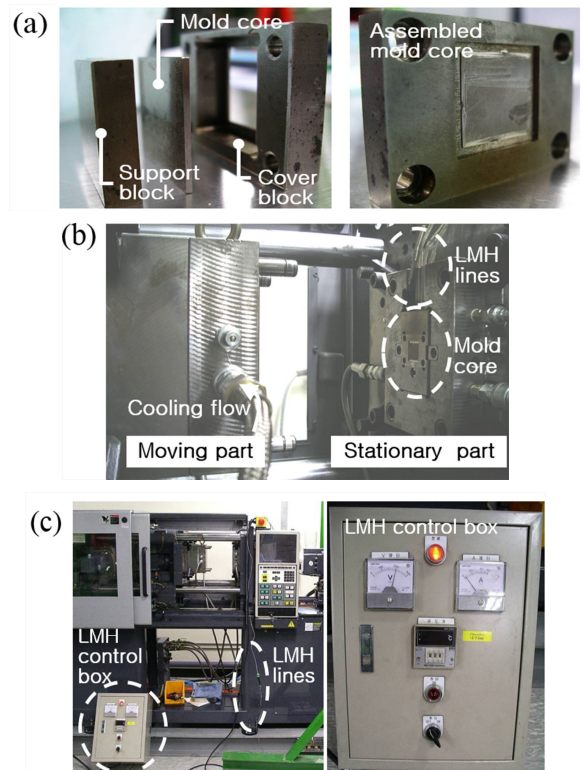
(a) Assembled mold core , (b) mold mounted on the injection molding machine, and (c) injection molding machine with LMH system
